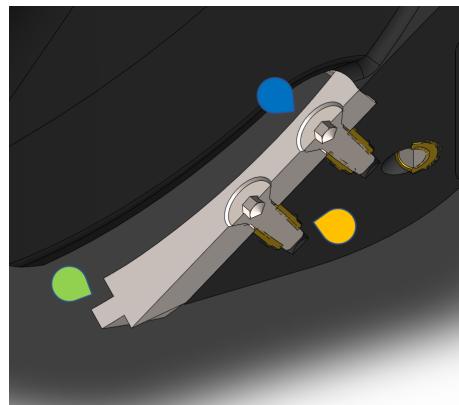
Drill Head Tooth depicting; securing screws [blue], cutting tooth [green] and threaded inserts [yellow].
